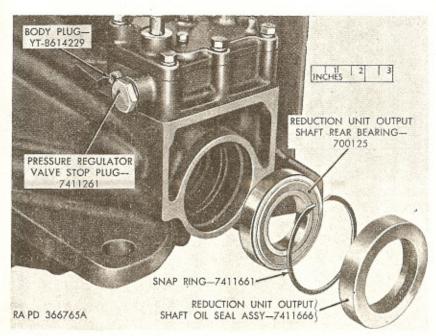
Output shaft oil seal, bearing, and snap ring removed.
